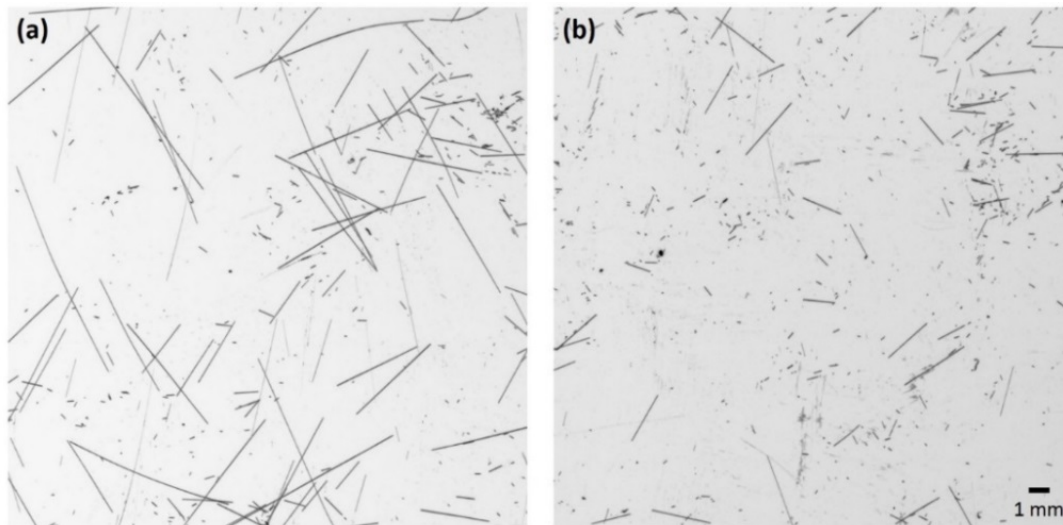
G.9. Scanned images of fiber length samples taken at Virginia Tech: (a) as-molded CFRP plaque; and (b) welded CFRP (1650 rpm, 20 mm/min). Source: General Motors.
